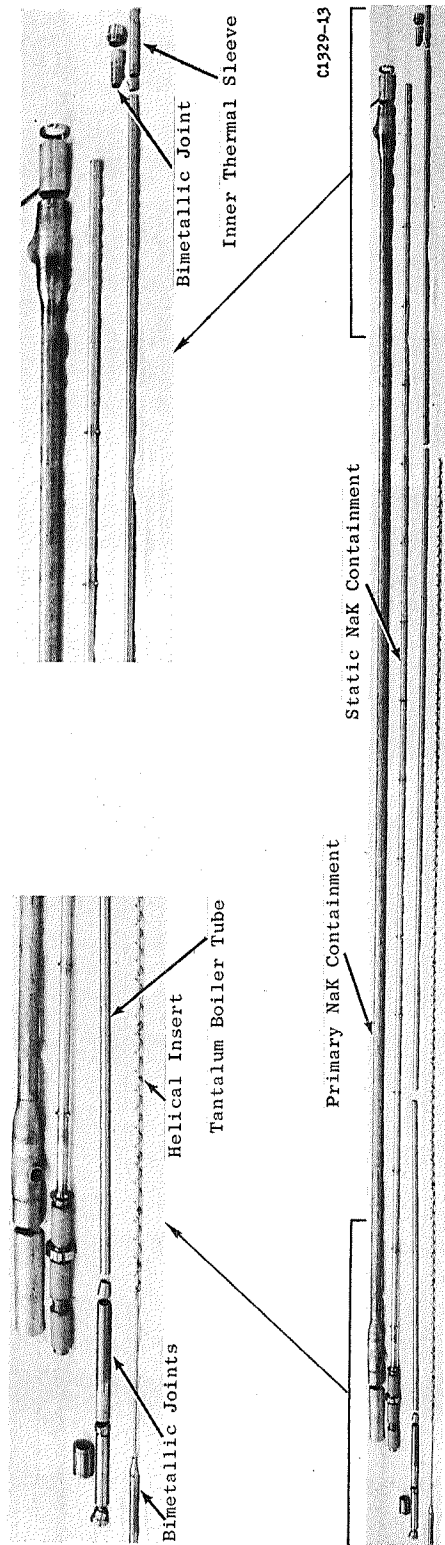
SNAP-8 Single Tube Test Boiler. (C68011583)
